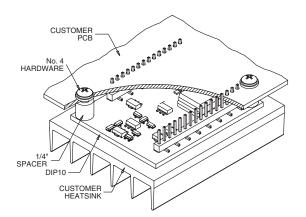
Mounting CL (DIP10) packages to very small heatsinks.
